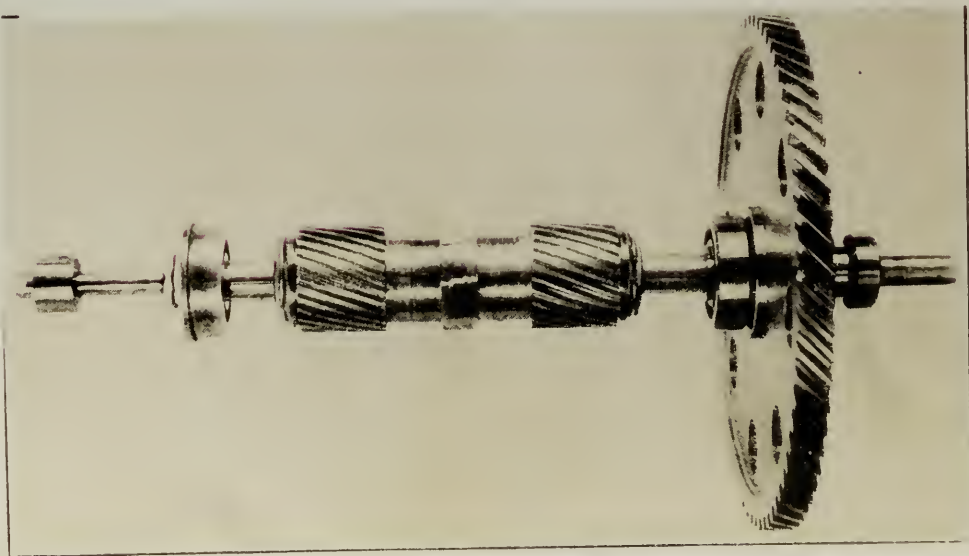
Camshaft Assembly. Parts Displaced Slightly
